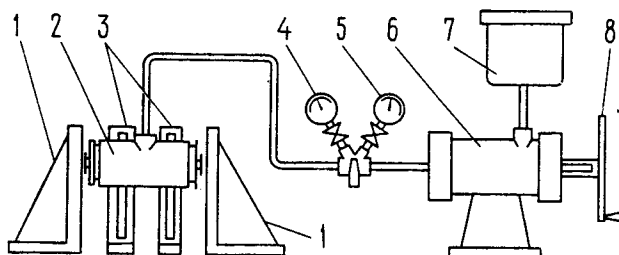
Rear Wheel Cylinder Checking Setup: 1 - piston stops; 2 - cylinder under test; 3 - cylinder bracket; 4 - low-pressure gauge; 5 - high-pressure gauge; 6 - pressure build-up cylinder; 7 - vessel; 8 - handwheel
